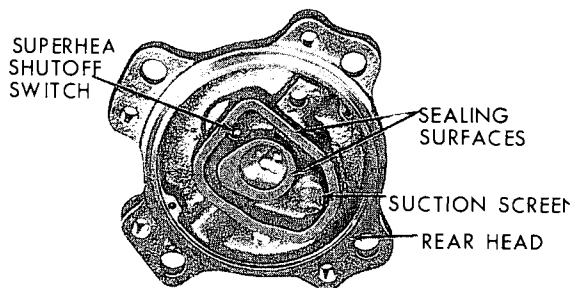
B-81 Rear Head Removal - 6 Cylinder Compressor
